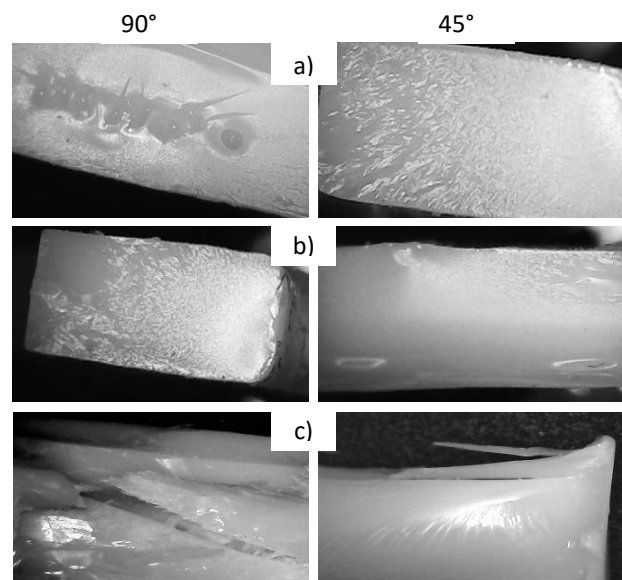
Fractured surfaces of DLP-LCD printed specimens after: a) tensile, b) flexure and c) compression testing.
